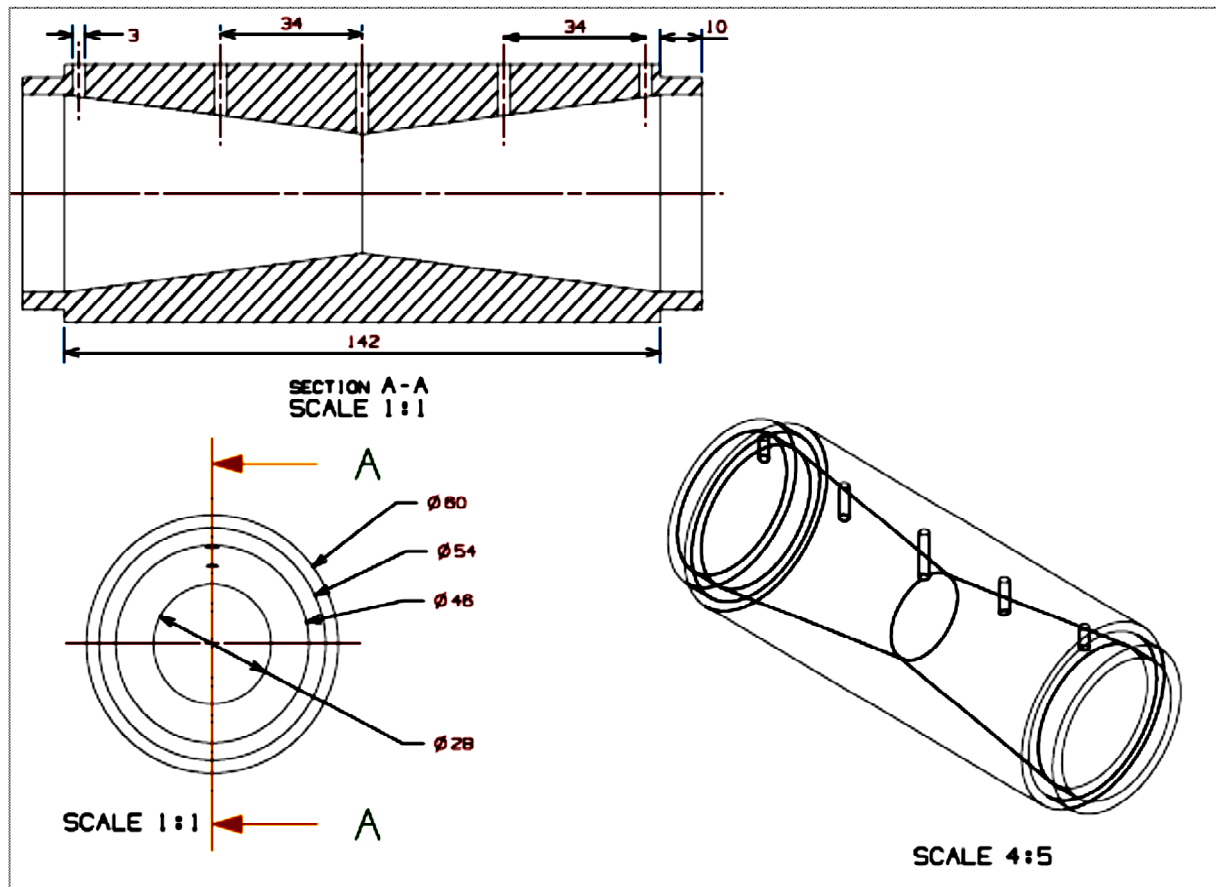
Drawing of C-D tube with $\beta=0.6$; $\theta=15^\circ$
